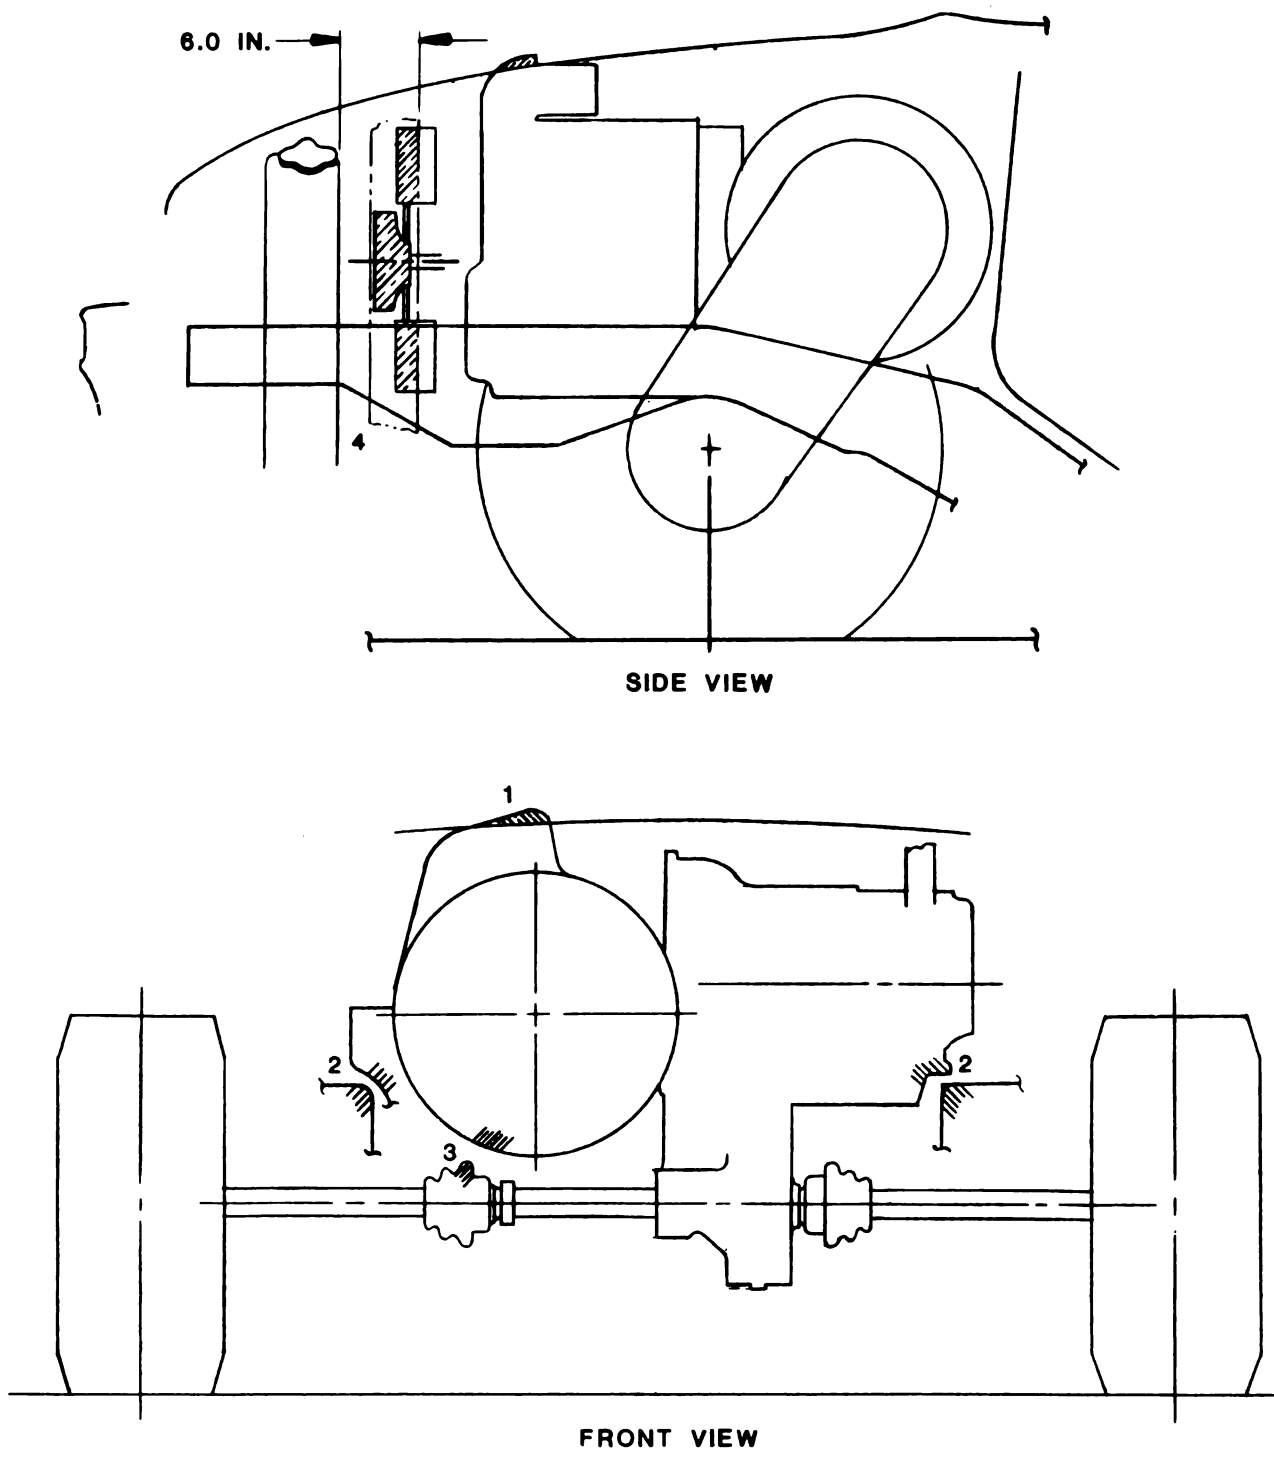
Scaled 120 HP Double Crankshaft Stirling Engine
